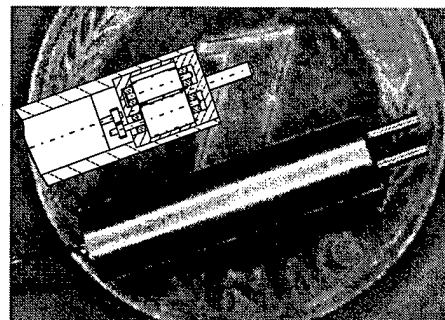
Oval gear pump. Demonstrator  $\varnothing 3,4 \times 11\text{ mm}^2$  with micro motor
